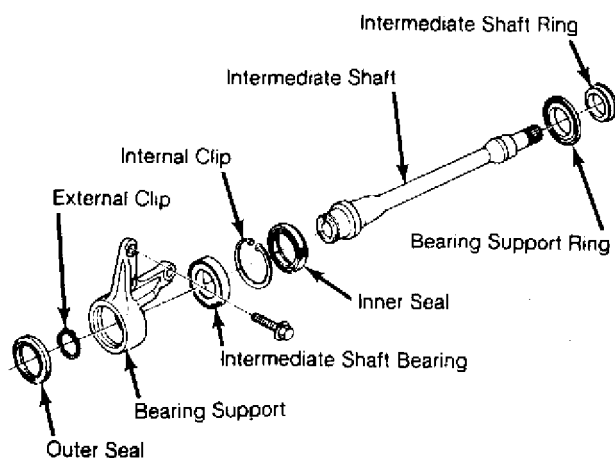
Exploded View Of Intermediate Shaft Assembly (Typical)
